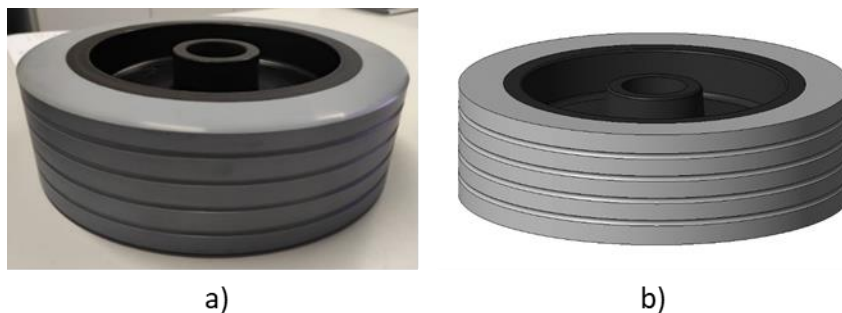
A a) physical sample and its b) CAD model of one overmoulded industrial wheel.
